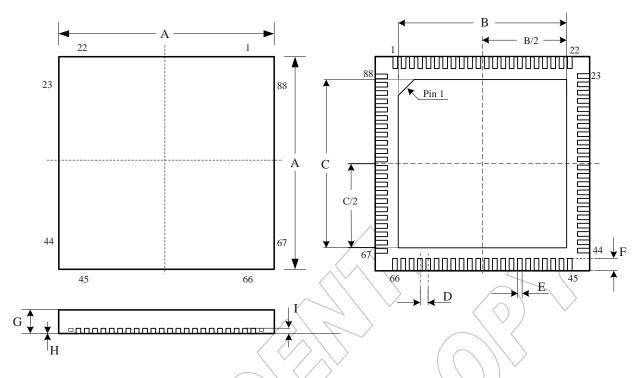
88 Pin QFN Package (10 x 10 mm)
